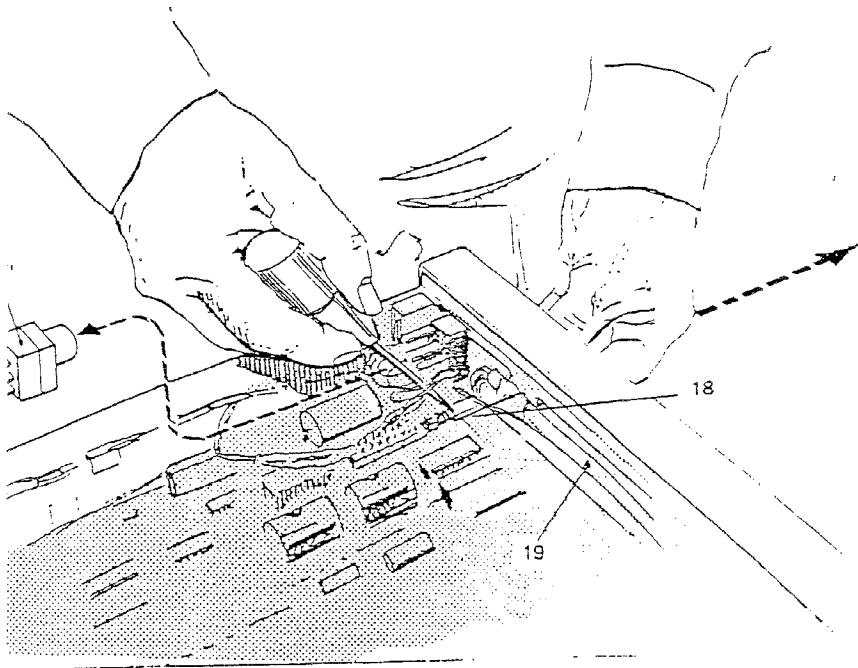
Exploded view of Instrument Showing Front Panel Removal
